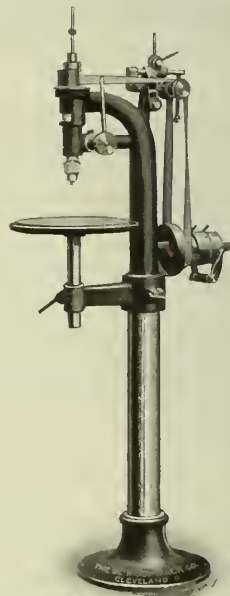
"Demco" No. 23 Floor Type of Ball Bearing Drilling Machine
